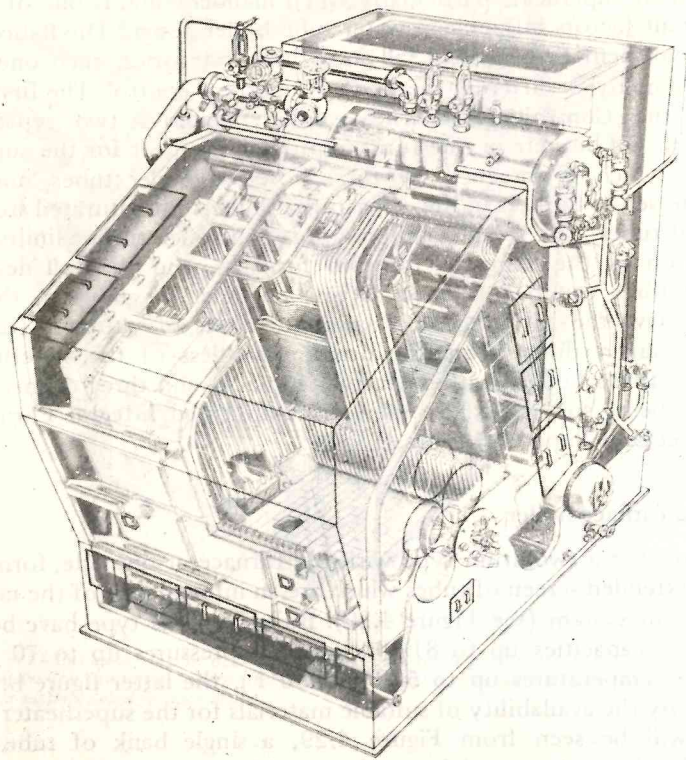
Cut-away view of Babcock marine boiler, integral furnace type
